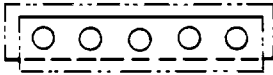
Straight line spot weld / Radpunktsvets
